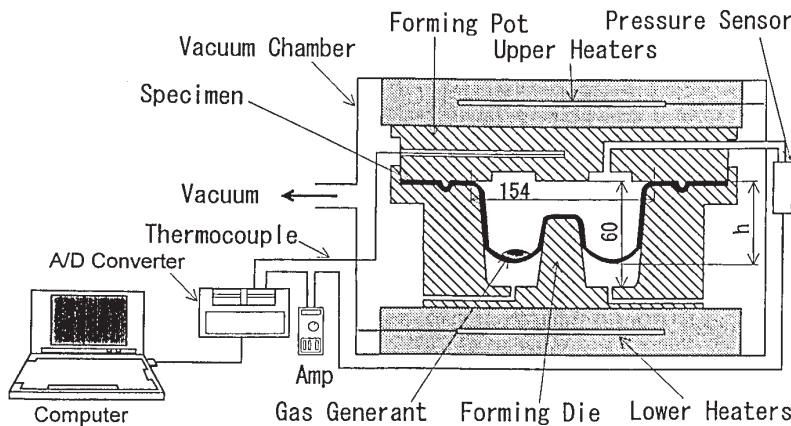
Whole system of experiment showing assembled die set and pressure, temperature sensing devices.
